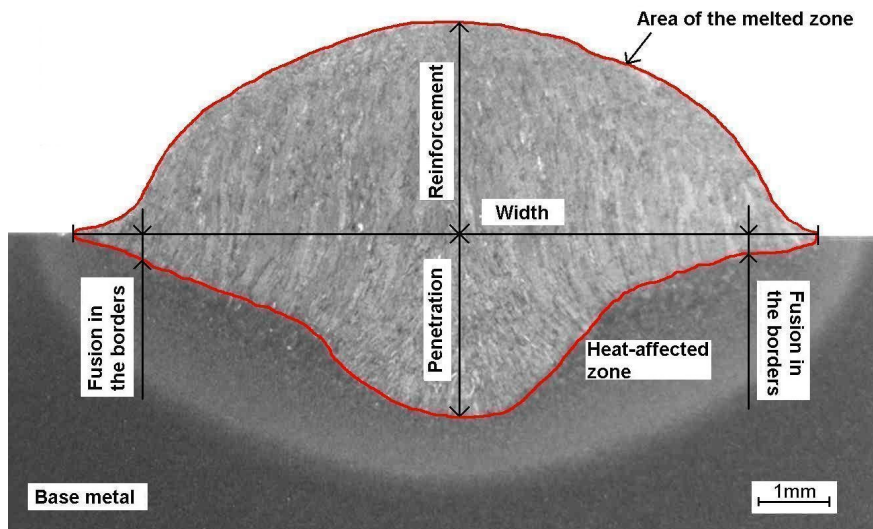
Traverse section of the weld bead using the mixture M2
